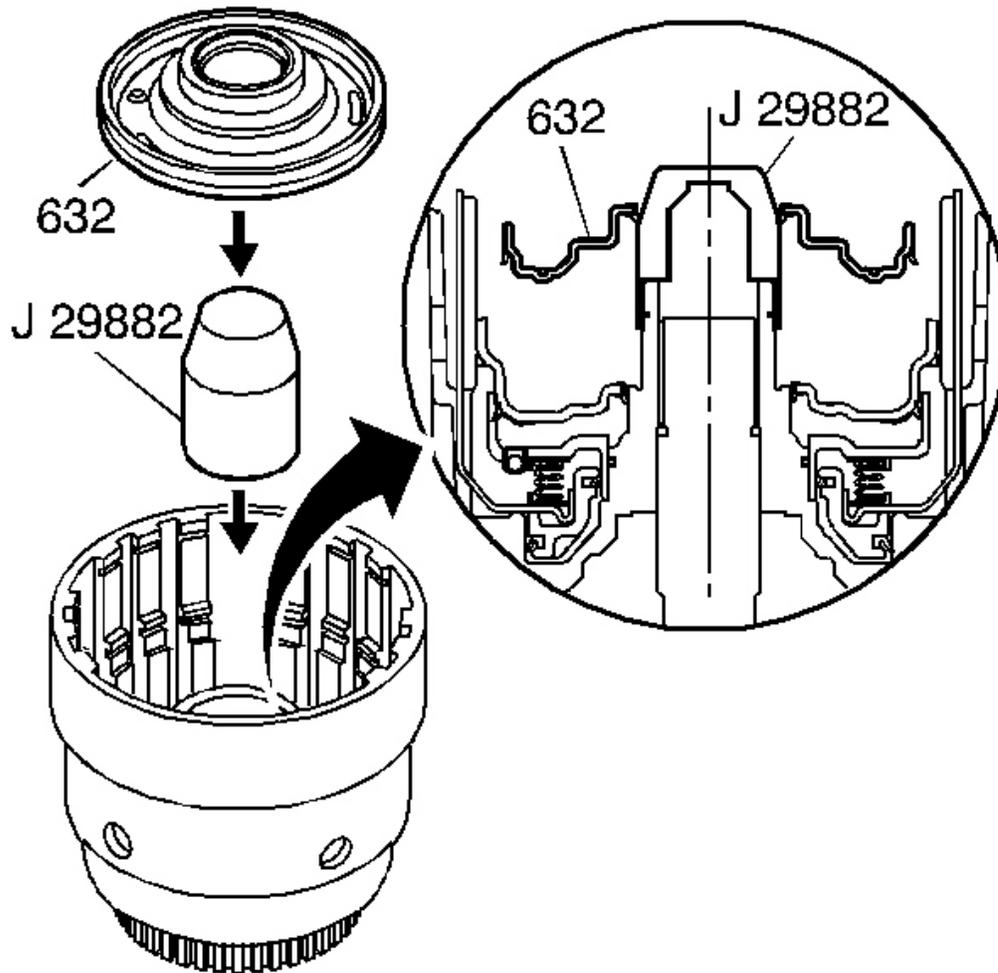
Installing J 29882 & Overrun Clutch Piston On Input Housing
